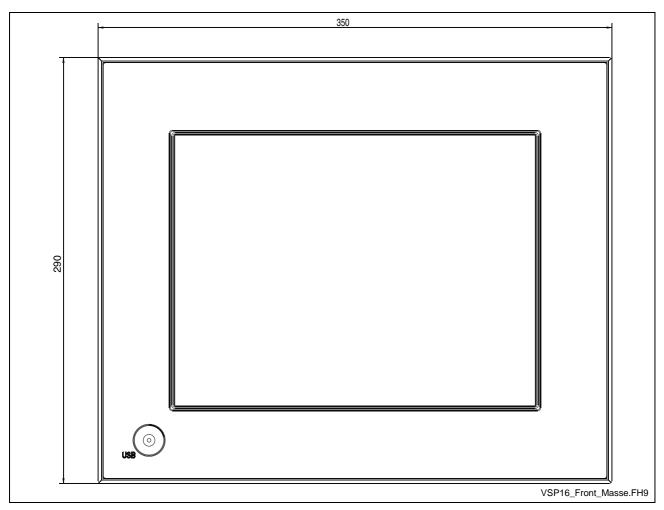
Dimension – Front panel VSP 16.1DB The front panel of the VSP 16.1BK with machine function keys has the same dimensions..
